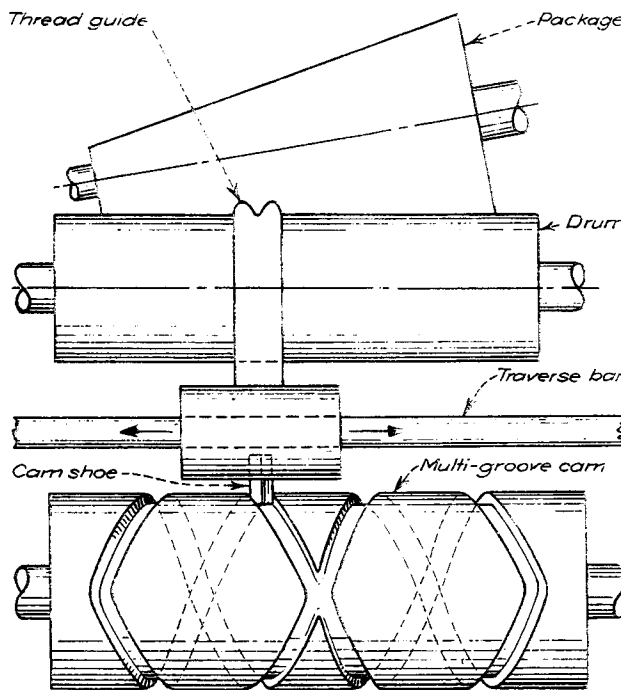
Drum drives package by friction. Pointed cam shoe which pivots in the bottom side of the thread guide assembly rides in cam grooves and produces reciprocating motion of the thread guide assembly on the traverse bar. Plastic cams have proved quite satisfactory even with fast traverse speeds. Interchangeable cams permit a wide variety of winds.
